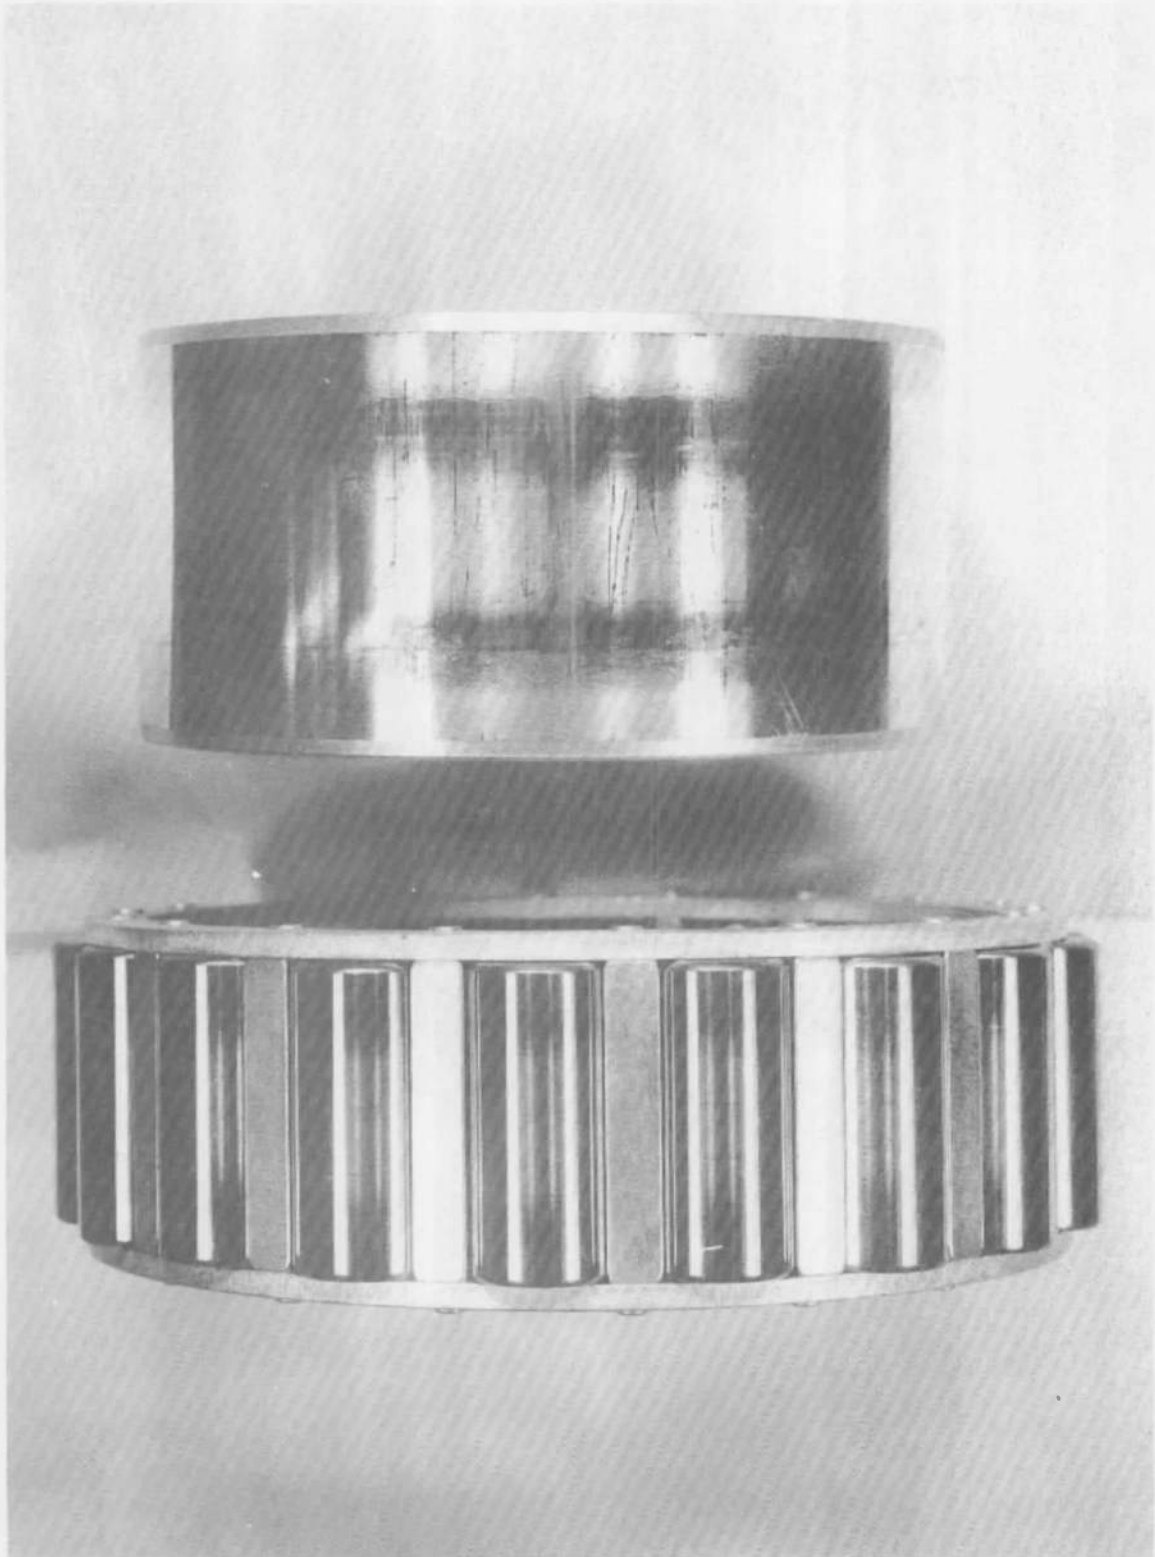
Test No. 3 (one of 4 bearings) – View of Ag Plated Inner Race and Roller-Cage Assembly from Cylindrical Bearing – Coating Intact and Polished
